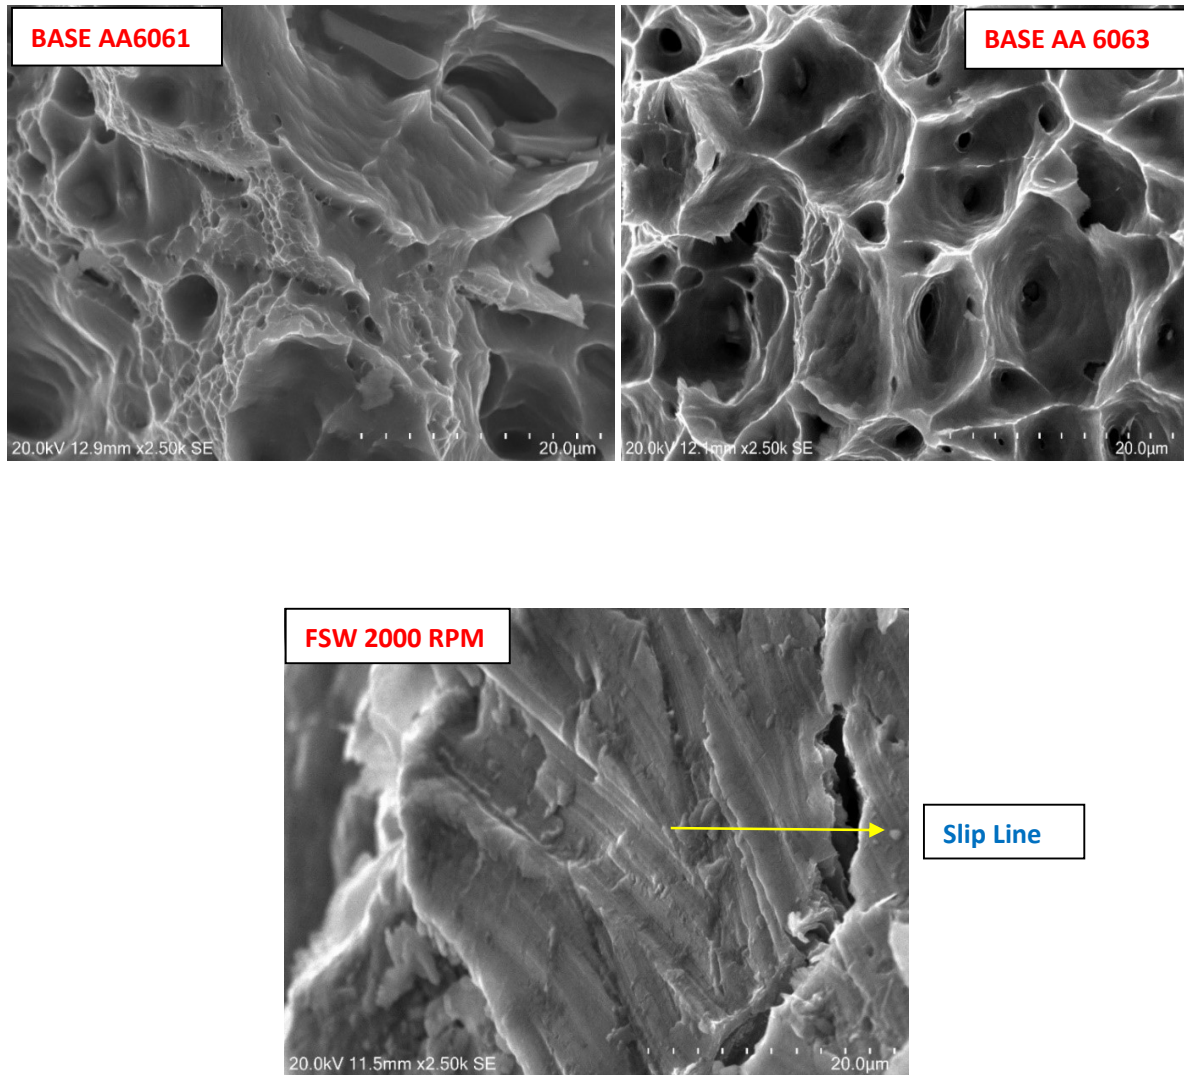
Tensile Fractography Base AA 6061, AA 6063 and Friction Stir welded sample with various Tool Rotation at 2500 X magnification.
